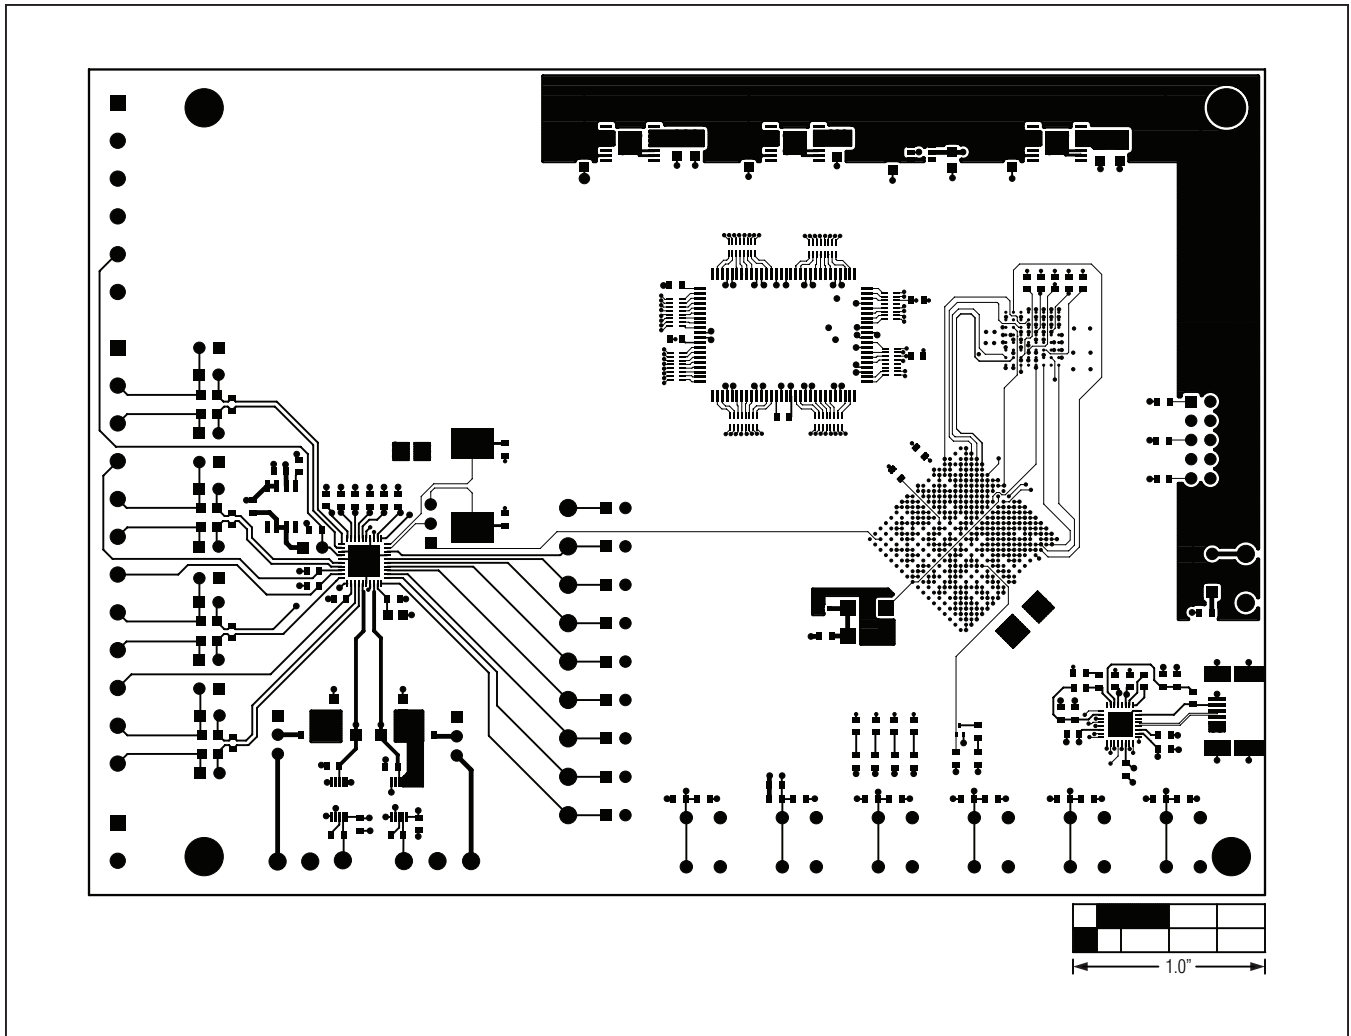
MAX1104311043 EV Kit PCB Layout—Component Side
